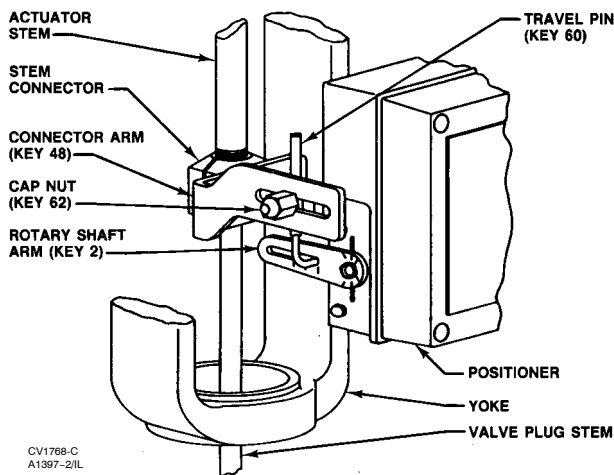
Isometric View Showing Motion Feedback Arrangement and Typical Stem Connection
